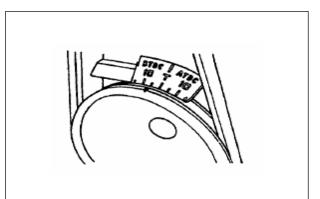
Engine Set at 0° Top Dead Center (TDC)
